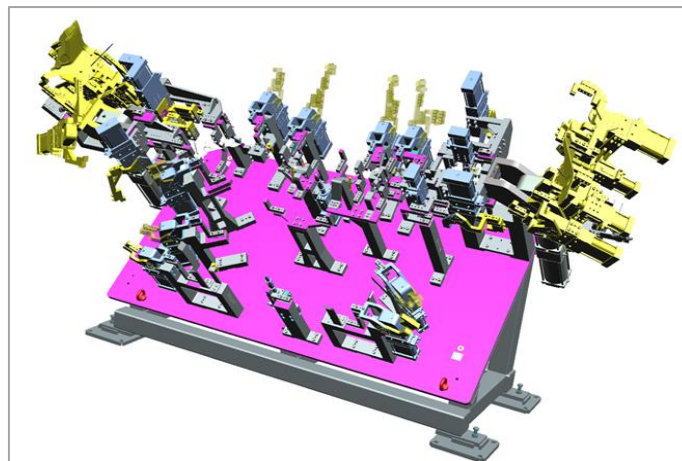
Ready fixture to weld sheet metal for Valmet
